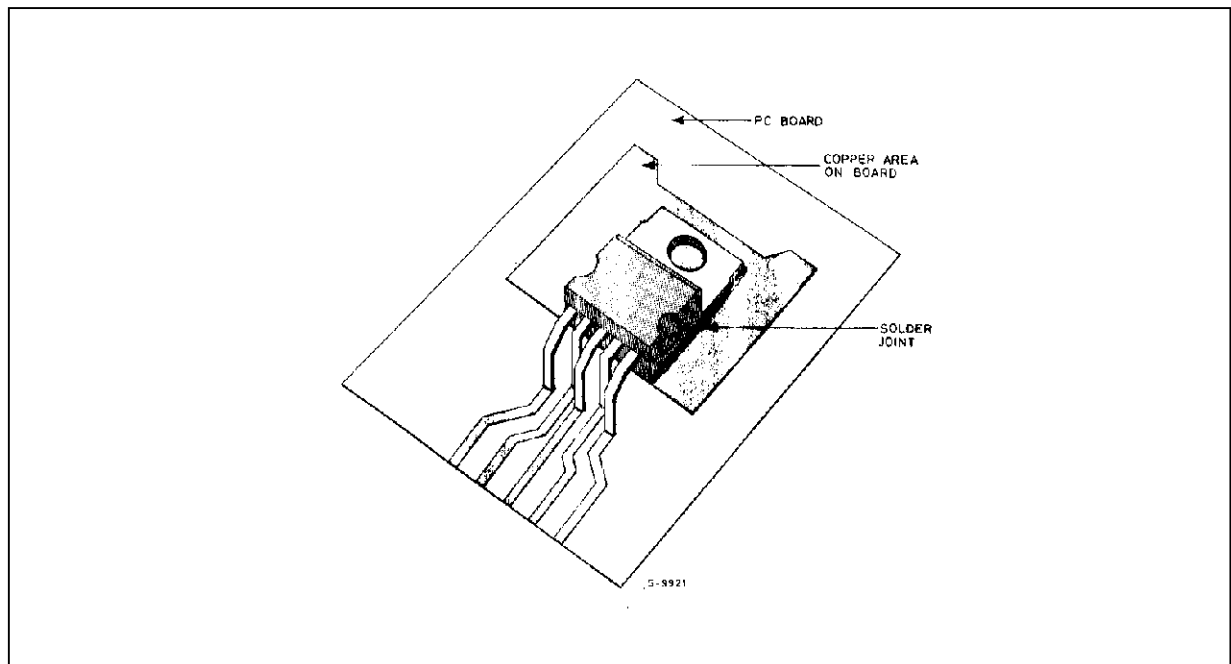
Pentawatt Soldered on Copper Heatsink on P.C Board.
